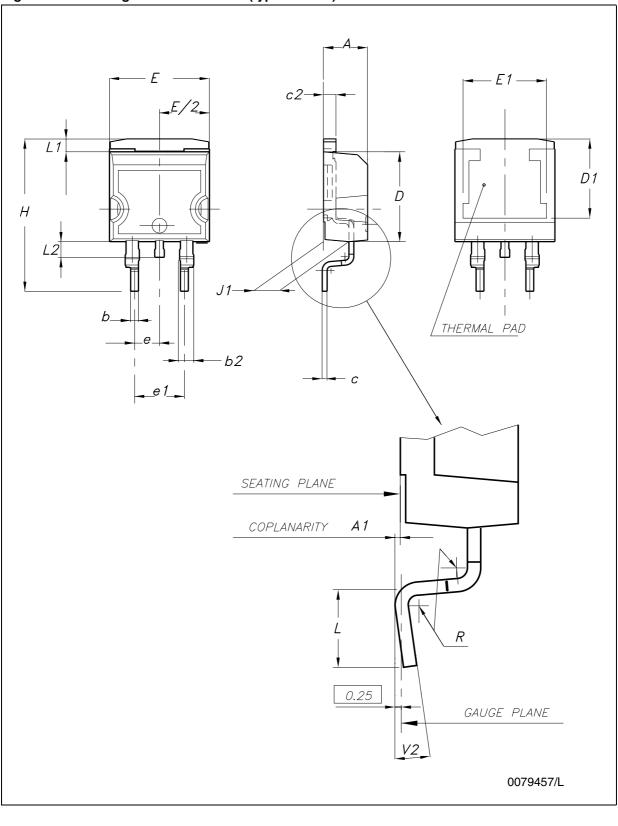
Drawing dimension D<sup>2</sup>PAK (type STD-ST)
